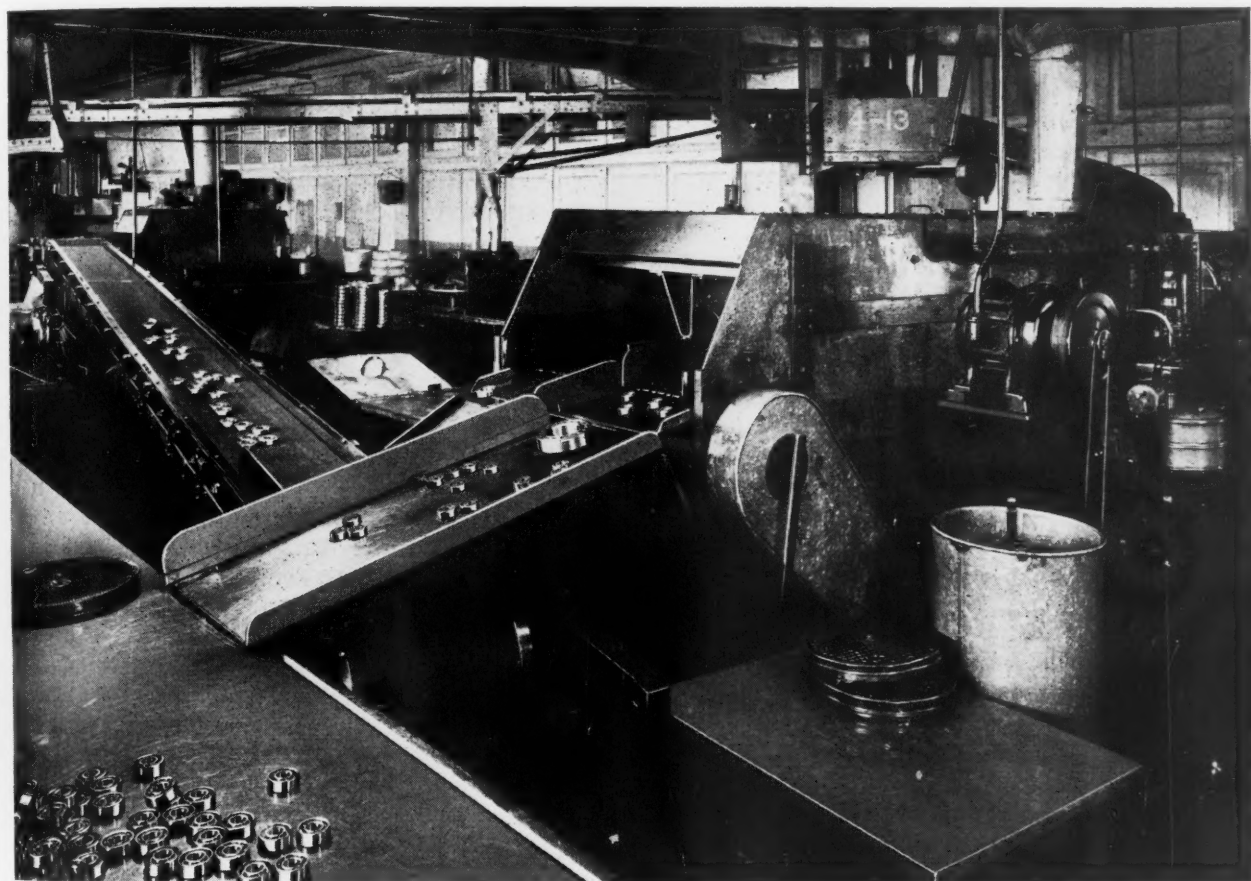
In this Plant the Ball Bearings are Washed Three Times During the Assembly and Final Inspection
